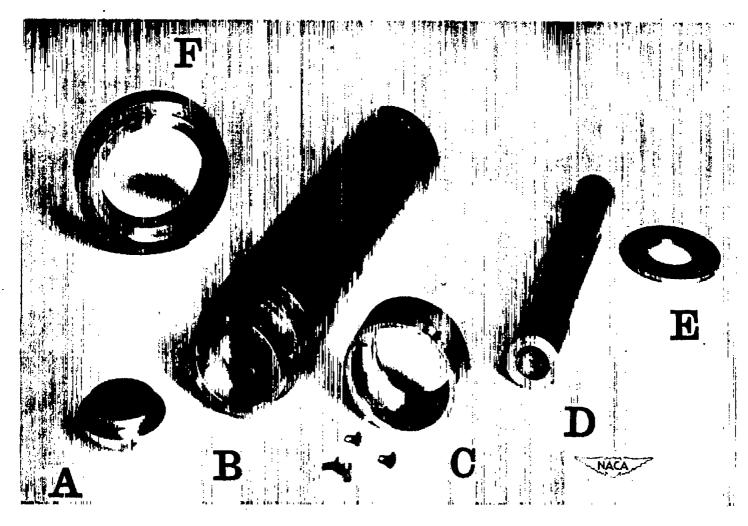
Disassembled compression tool plunger. A, spherically seated bearing block; B, plunger (ball through which load is transmitted from rod D to plunger is inside latter); C, retainer for bearing block; D, loading rod; E, centering washer for rod D; F, limit collar for plunger.
